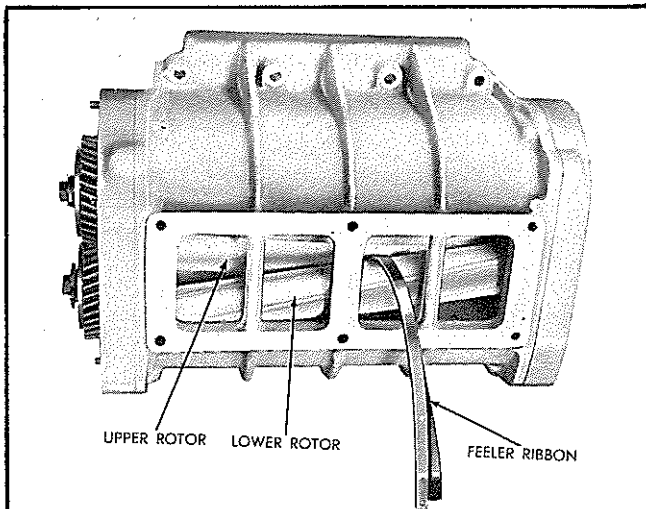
Measuring Clearance Between Rotor Lobes from Inlet Side
